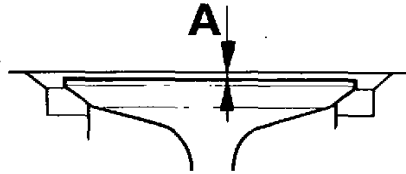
Dimension A, 100-series: 1.20–1.70 mm (0.047–0.067"), max. 2.5 mm (0.10")
